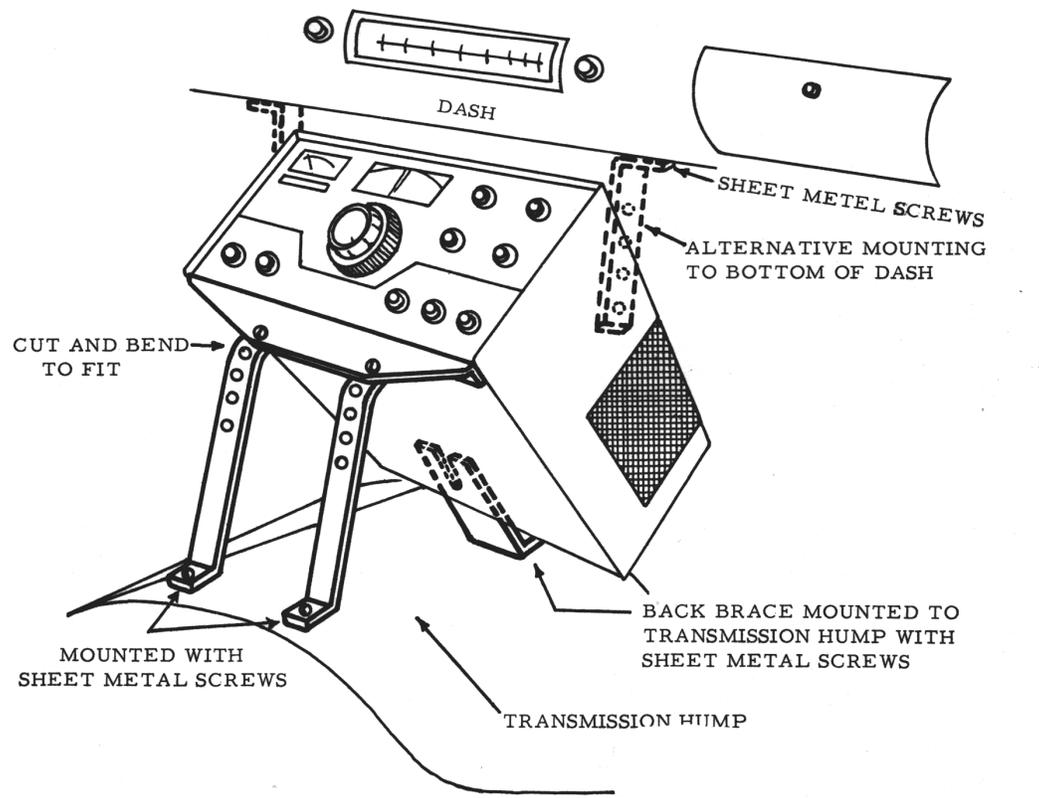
MOBILE INSTALLATION MOUNTING DETAILS
